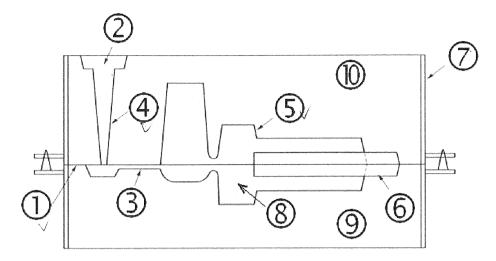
Casting terminology: COPE, DRAG, Riser, Pouring cup, Gating system, Flask, Core printing, Draft, Sprue, Parting line.
